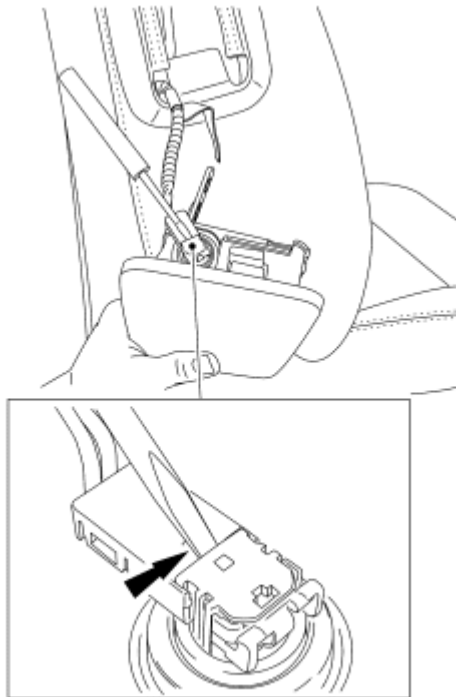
Lifting Up & Releasing Locking Button On Side Air Bag Module Electrical Connector Using A Small Screwdriver
